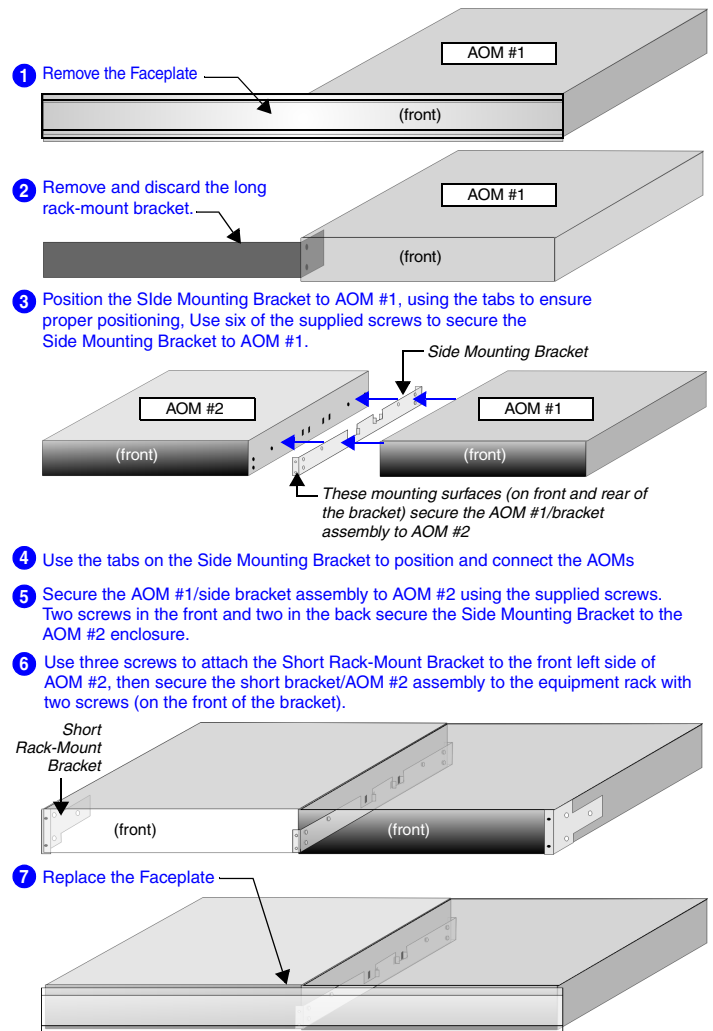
Using the optional MAX-AOM-EX Expansion Kit to mount two AOMs in a single rack space.
